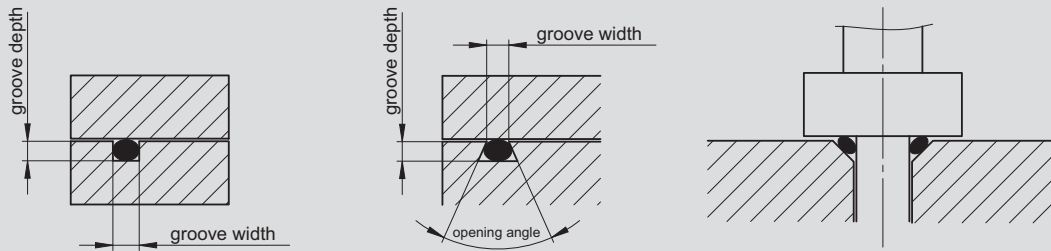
O-ring seals in rectangular groove, trapezoidal-groove and in an angular position
